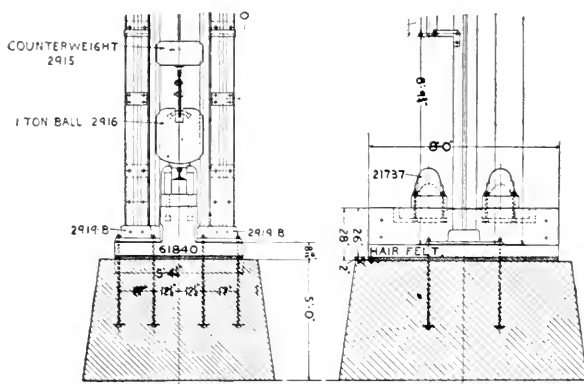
Base of Drop-Testing Machine, Type "C."
